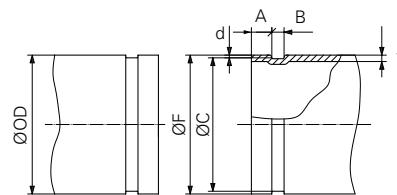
Roll grooved-end dimensional reference points for Table 1
